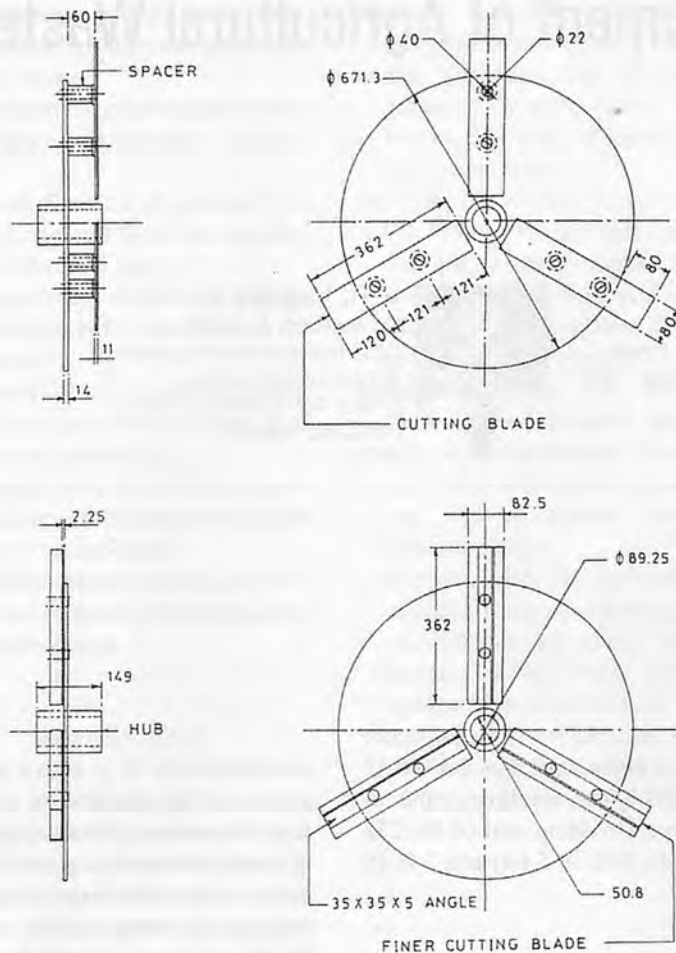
DETAILED DIMENSIONS OF CUTTING UNIT
